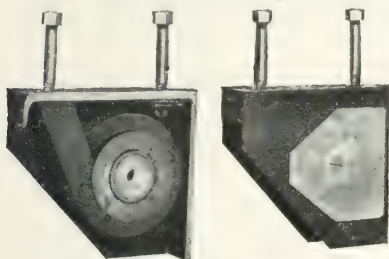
BLOWOUT COILS USED WITH UNIT SWITCH
